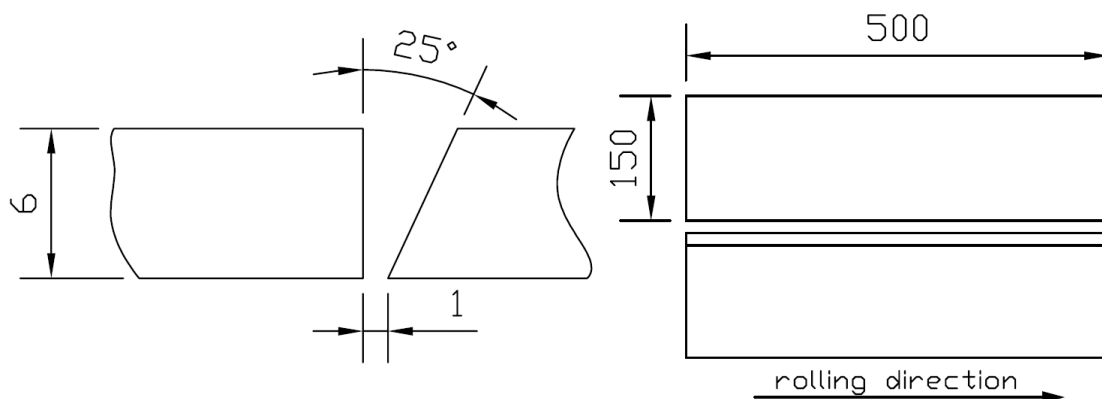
Geometry of weld preparation and welded plates. Dimensions in mm
